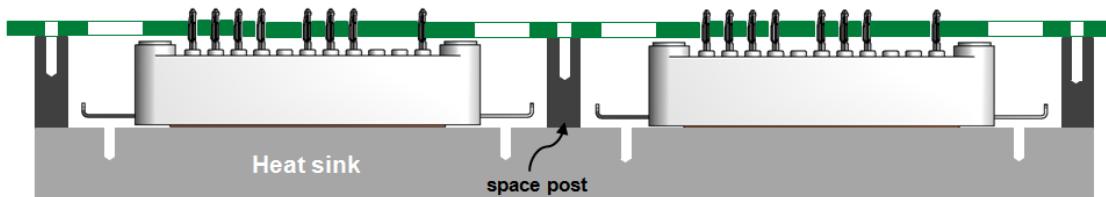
Space Posts for Assembly of PCB to Heat Sink
